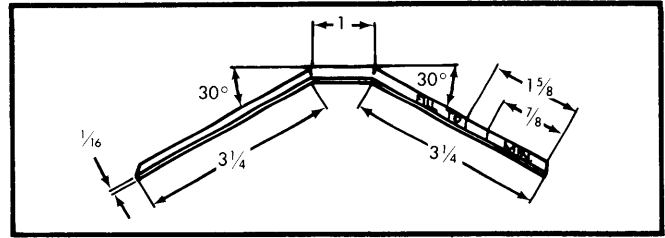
Dimensions for Locally Made Tecumseh Compressor Oil Level Dipstick
